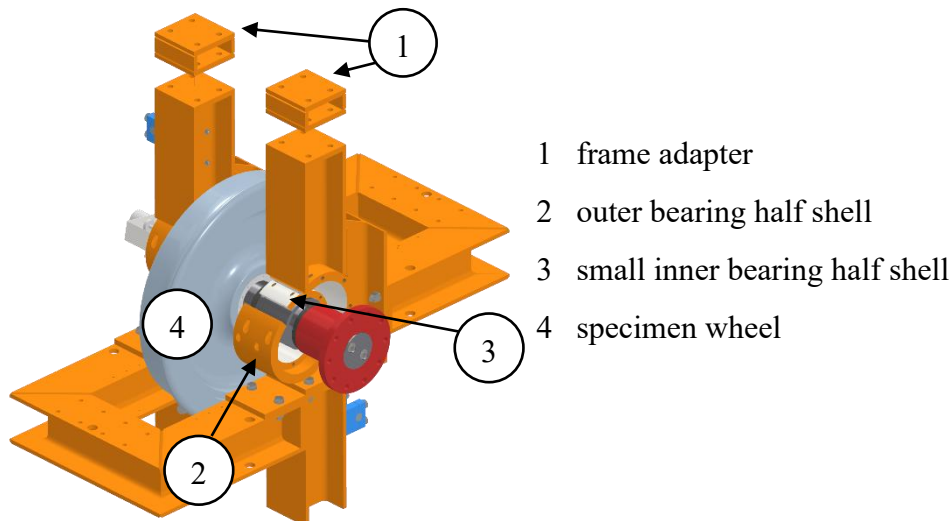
Partly exploded view of variable mounting frame with adapter and bearing half shells
